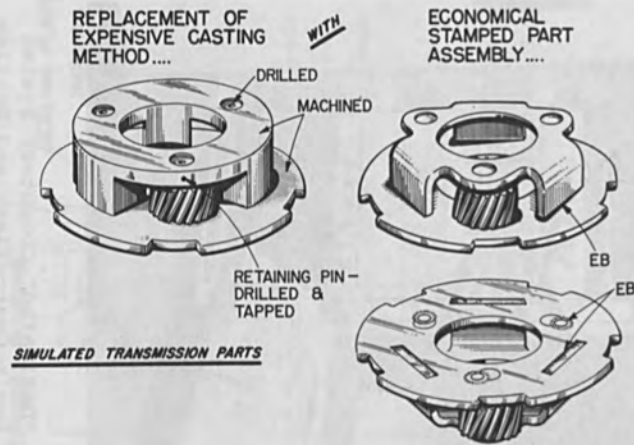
Typical Automotive Application - Mechanical Casting is Replaced by Stamped, Formed and E.B. Welded Sheet or Plate.
